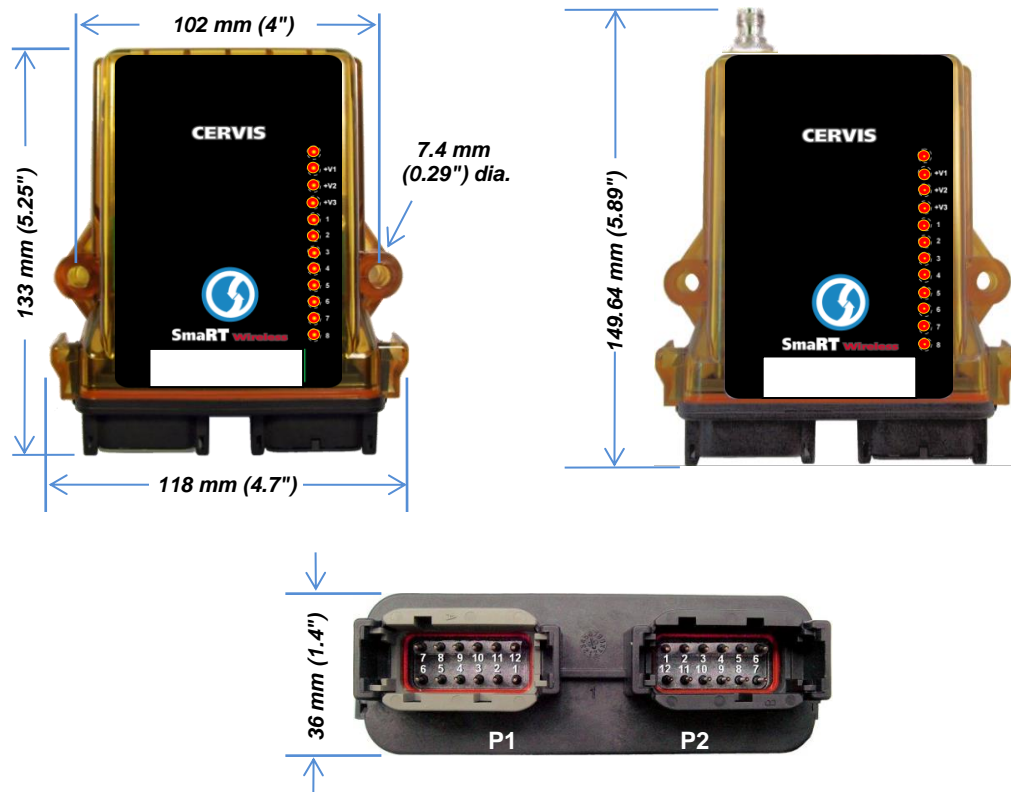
BU-xH20XF Base Unit Mounting Dimensions
